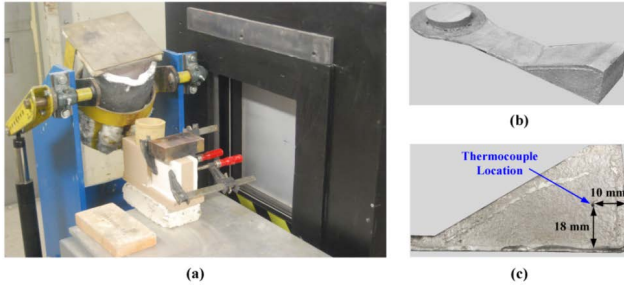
Photos of experimental setup (a) mold and imaging facilities, (b) wedge casting, (c) location of thermocouple on the wedge casting
